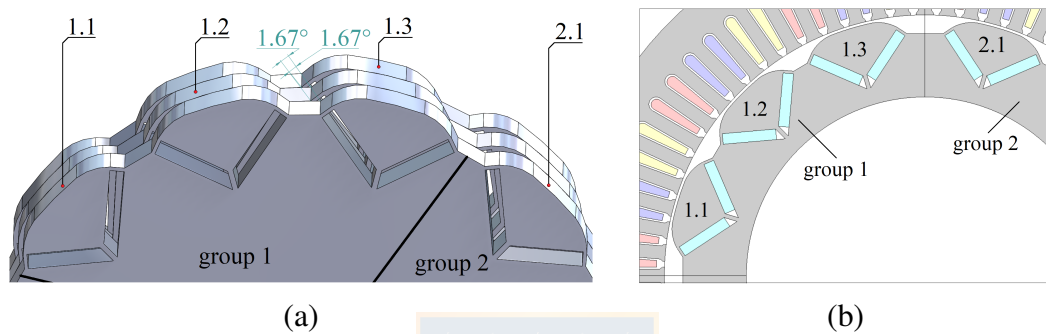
Examples of the step skewing: (a) three-step skewing of the 12 pole rotor with the skew angle of 1.67° between the layers and (b) quasi-three-step skewing of the 12 pole rotor with the quasi-skew angle of 1.67° .
